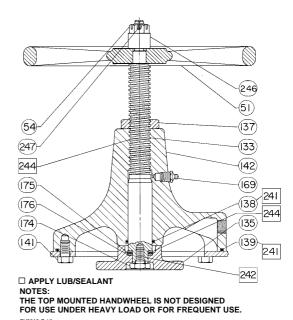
Top-Mounted Handwheel Assembly for Sizes 70 through 87 Actuators
